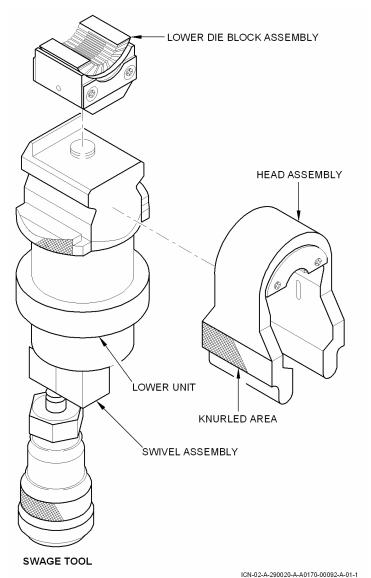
Permaswage Fitting - Installation (sheet 1/4)
